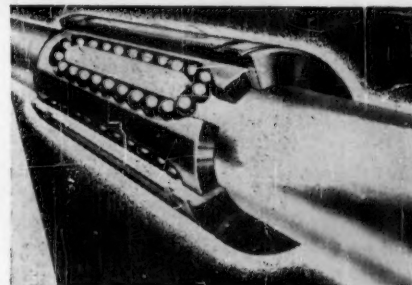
Phantom View of the Ball Bearing Sleeve.
